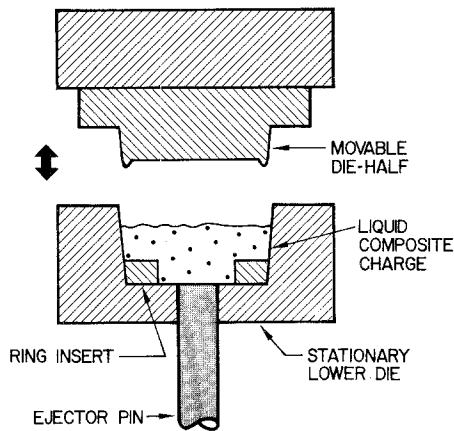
Schematic illustration of the forging dies used in forming of the aluminium-matrix composites in the hydraulic press.
